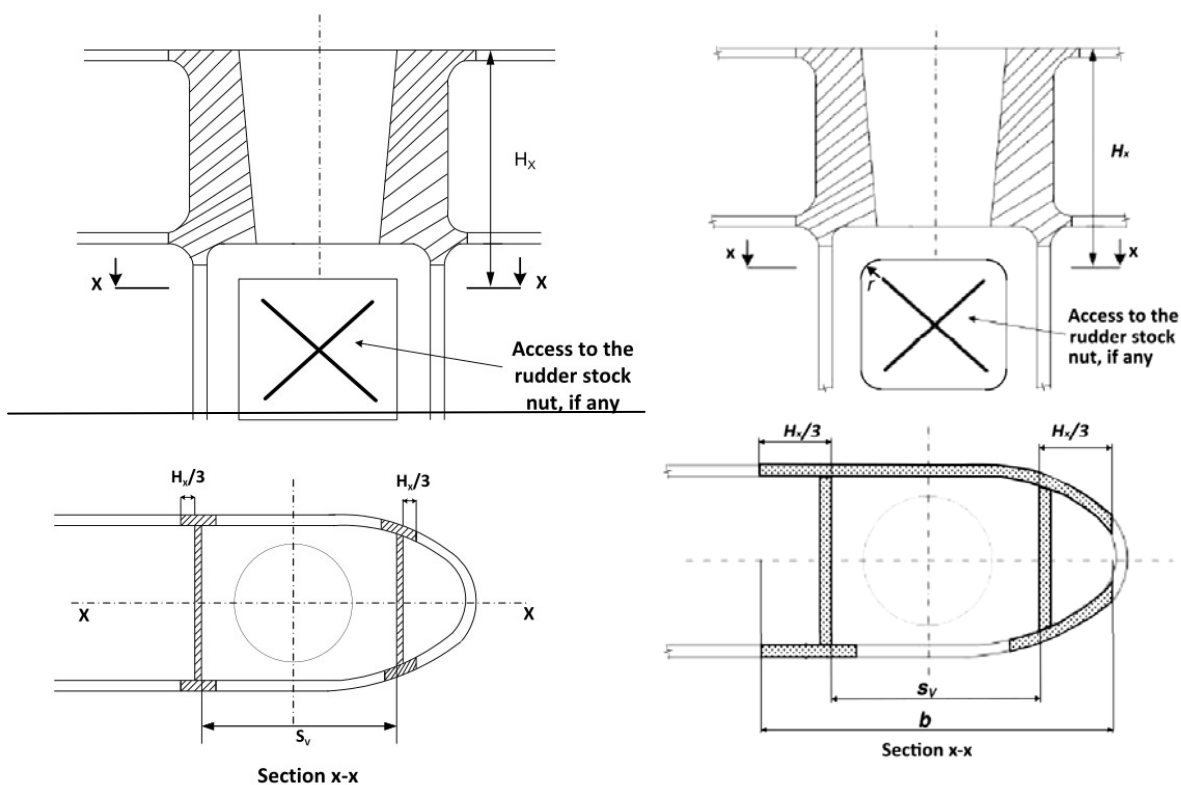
Cross-section of the connection between rudder blade structure and rudder stock housing, example with opening in only one side shown
